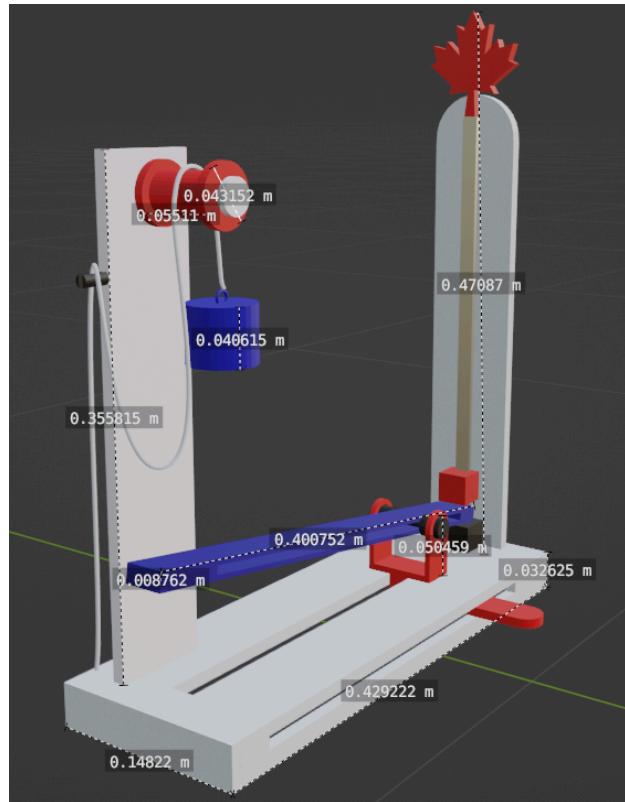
Assembled CAD of the Final High-Striker Design With Measurements. Adapted from [31].
